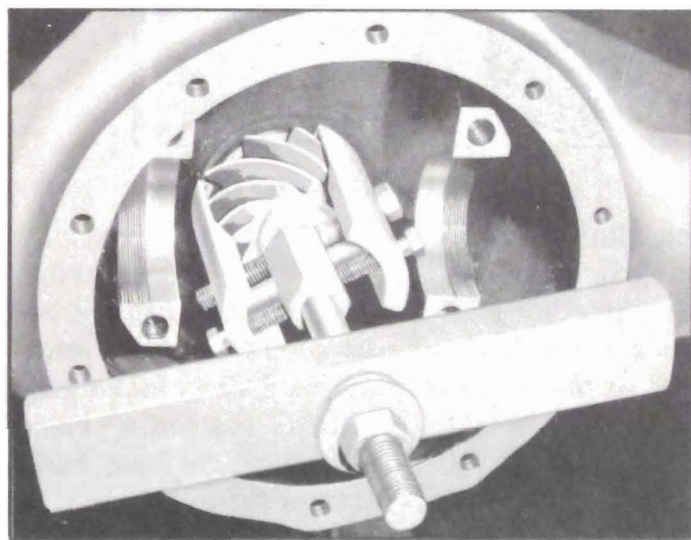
Removing Pinion and Propeller Shaft with Puller
